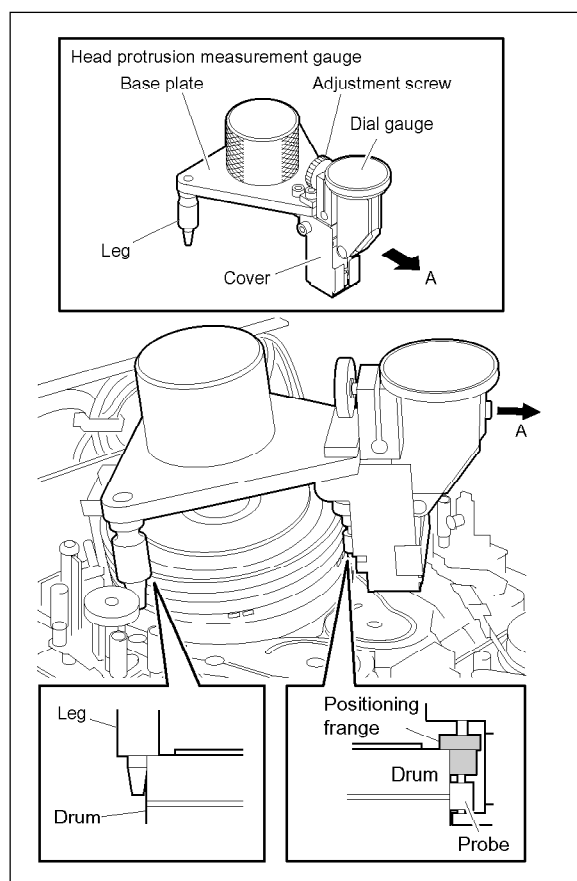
Setting of Head Tip Protrusion Measurement Gauge
